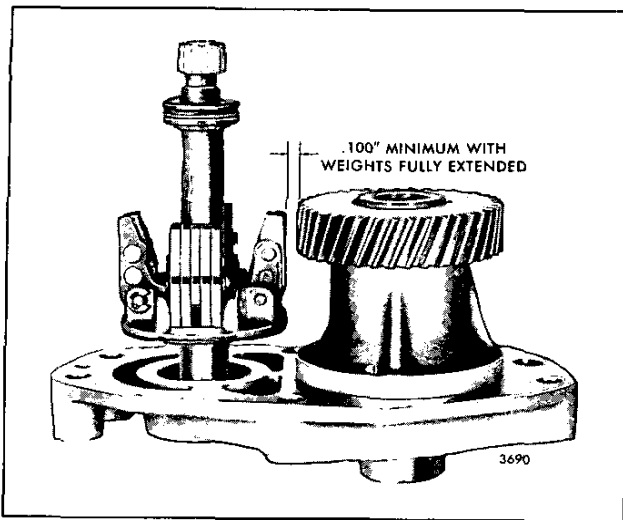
Minimum Clearance Between Blower Drive Gear and Governor Weights
